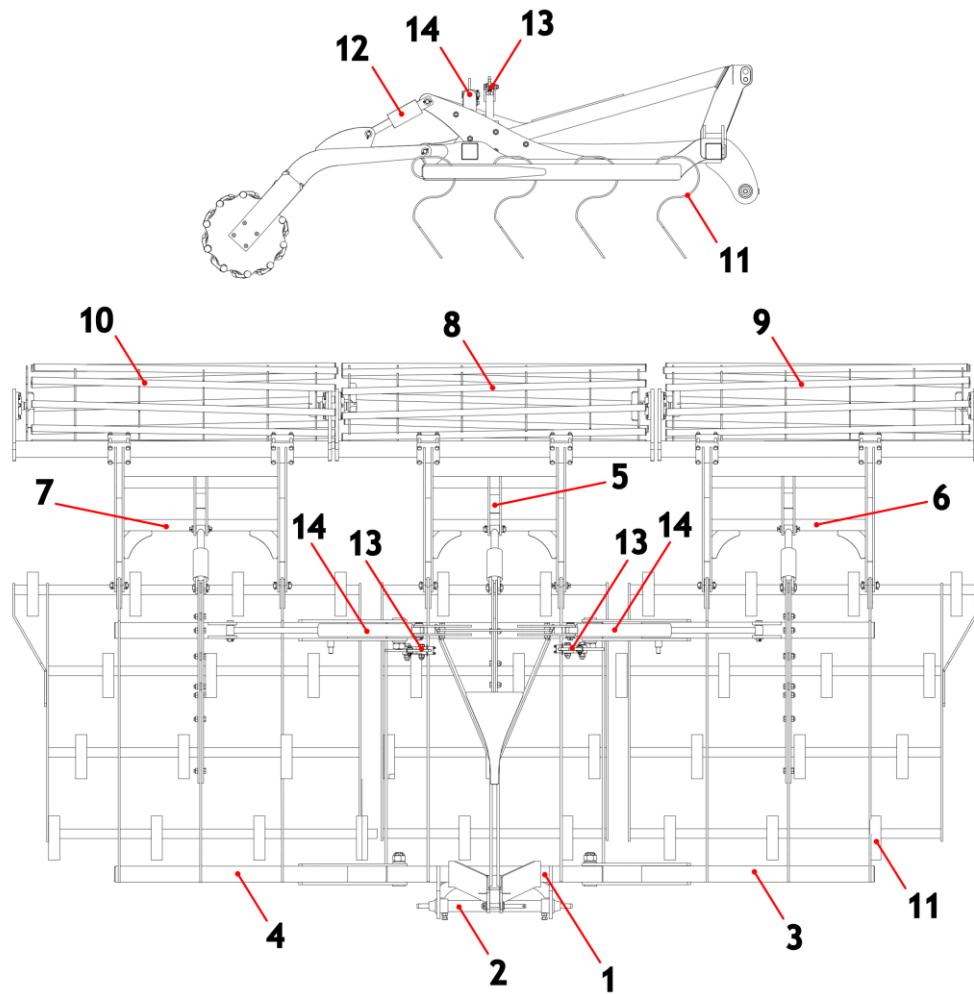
Construction of the cultivator SUPER hydraulically folded with tubular roller (option)( 1 - centre frame, 2 - drawbar, 3 - left frame, 4 - right frame, 5 - centre frame arms, 6 - left frame arms, 7 - right frame arms, 8 - centre tubular roller, 9 - left tubular roller, 10 - right tubular roller, 11 - spring tine, 12 - hydraulic roller lifting unit, 13 - automatic wing lock, 14 - actuators)
